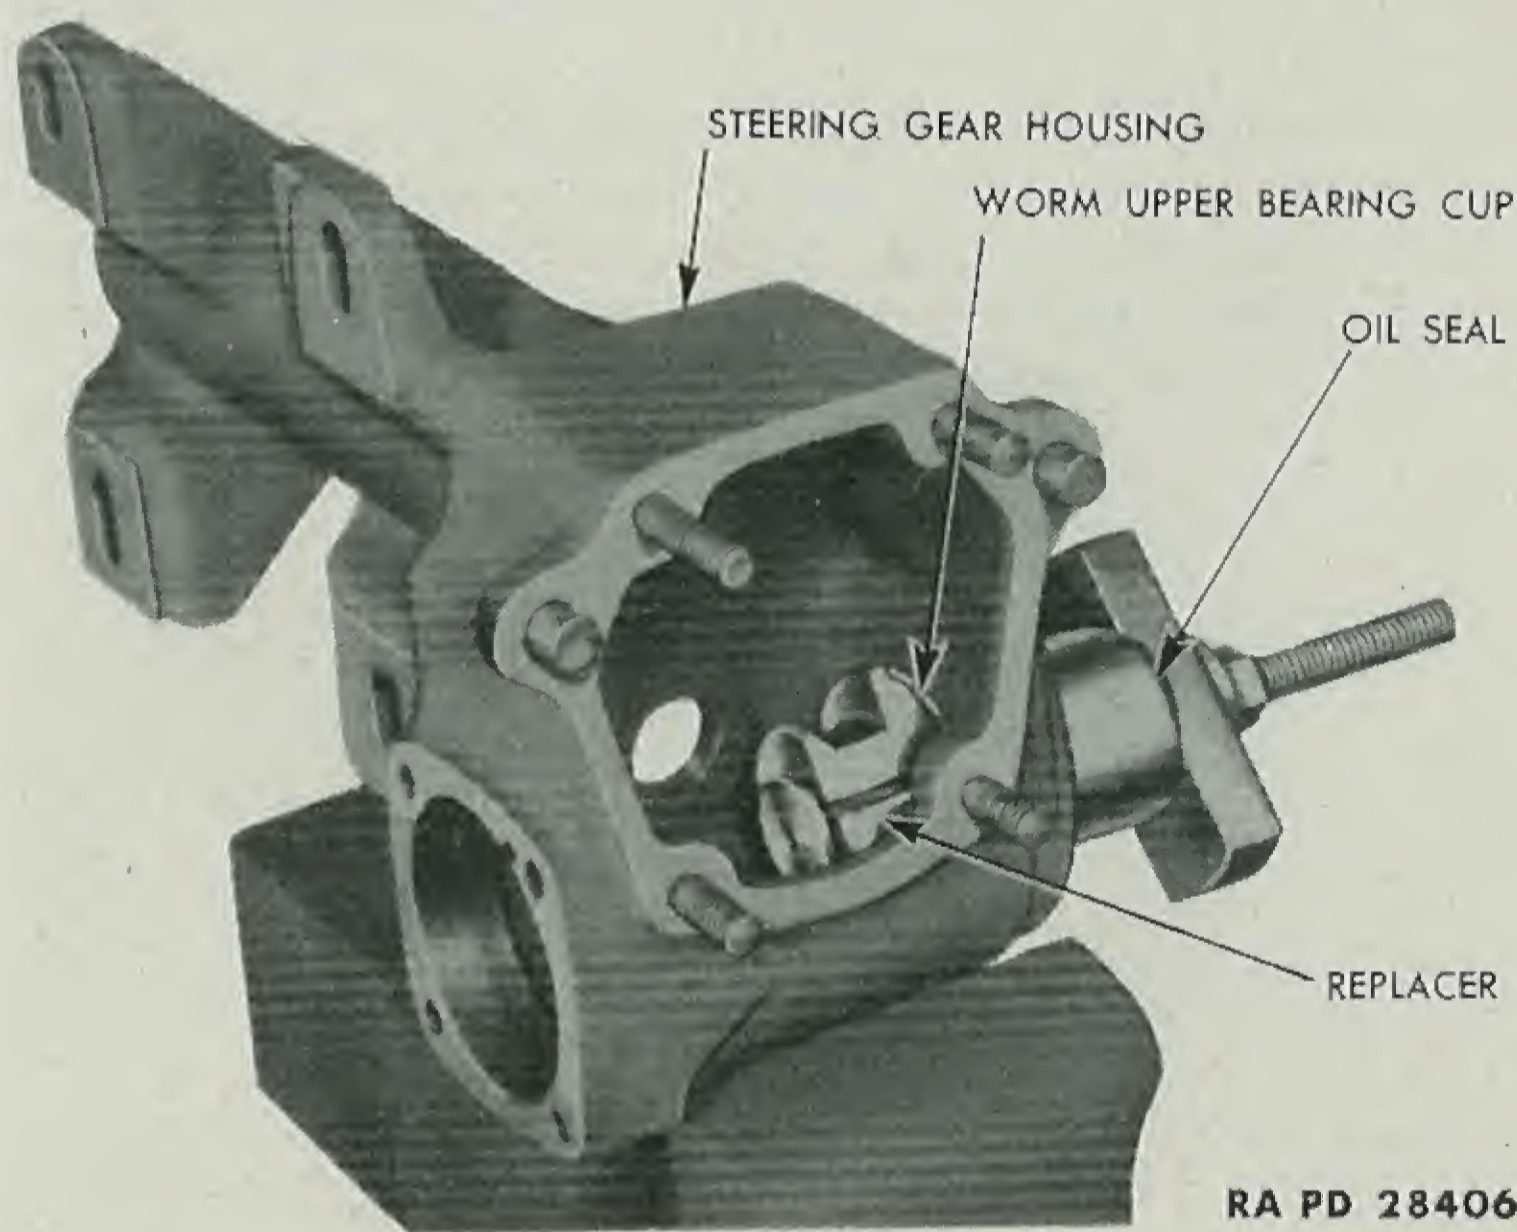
Installing Worm Upper Bearing Cup and Oil Seal with Replacer 41-R-2395-110
